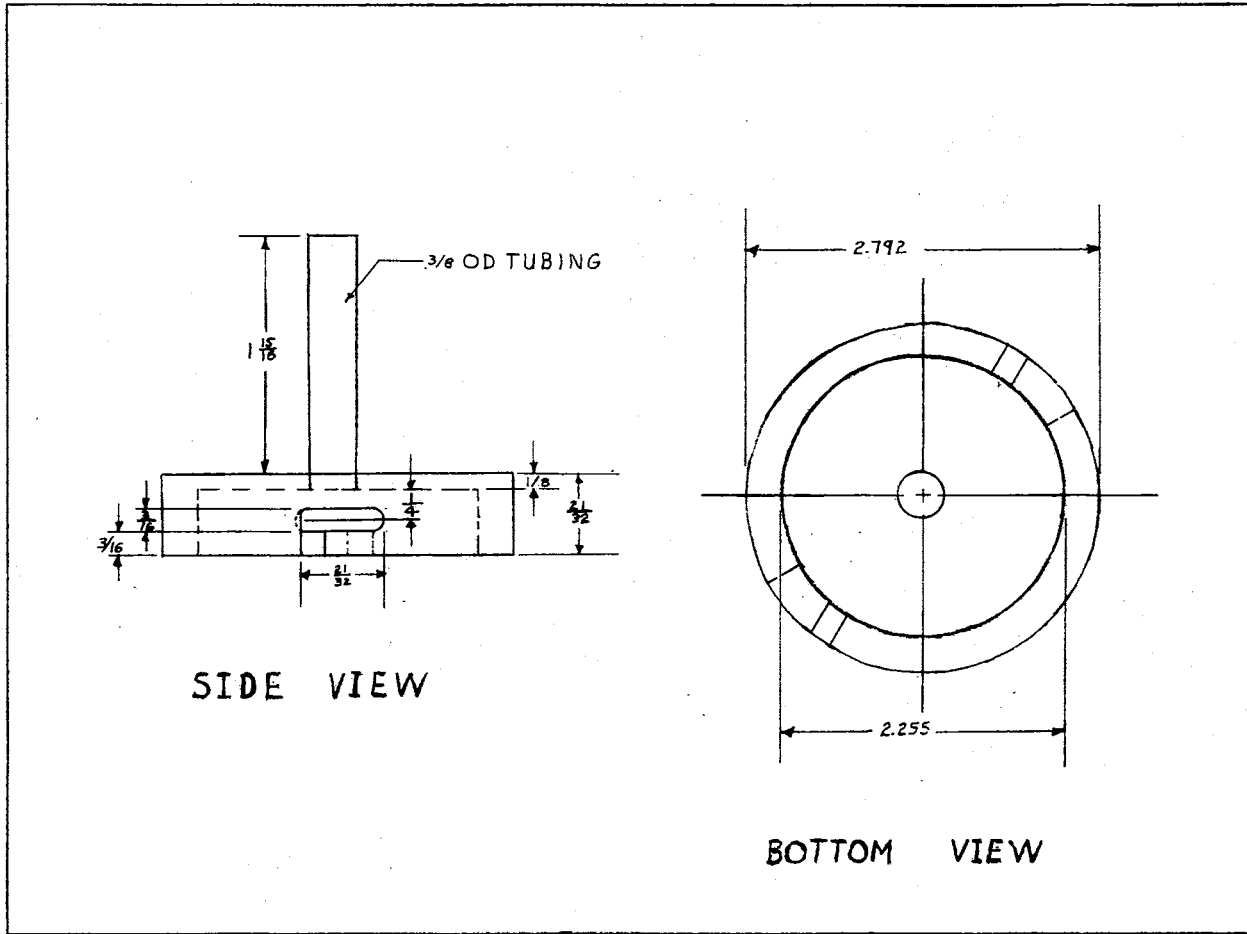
Detailed Dimensioned Drawing of the 100 ml Evaporative Dosimeter Cap
